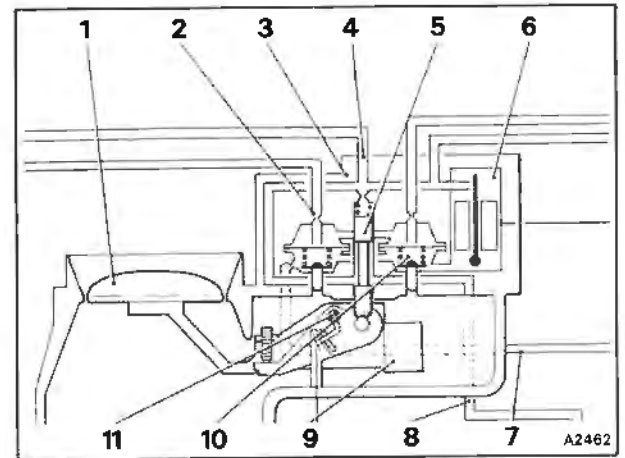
Air flow sensor and fuel distributor (mixture control unit)
